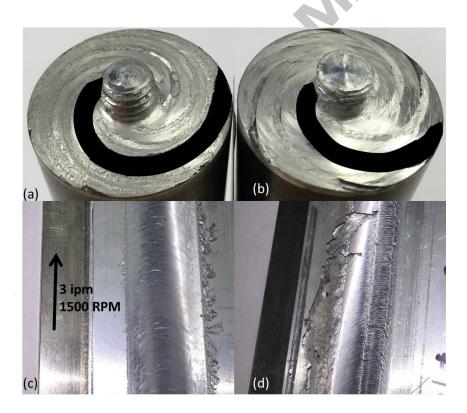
(a) Tool A with threaded probe and scroll pattern highlighted, (b) Tool B with threaded probe and scroll pattern highlighted, (c) Surface of Tool A, (d) Surface of Tool B
